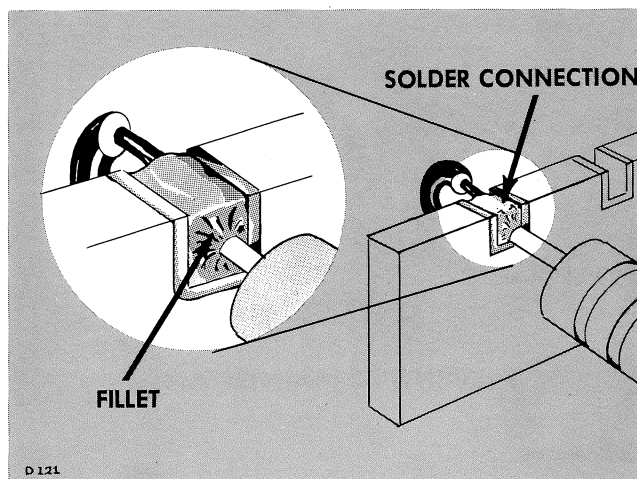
A slight fillet of solder is formed around the wire when heat is applied correctly.
